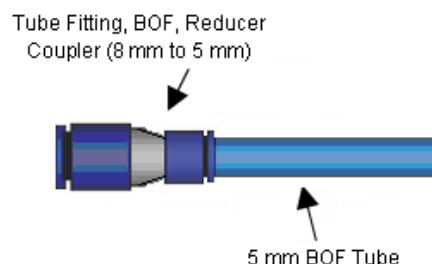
L1-9. BOF 8-to-5-millimeter reducer coupler with 5-millimeter BOF tube.
